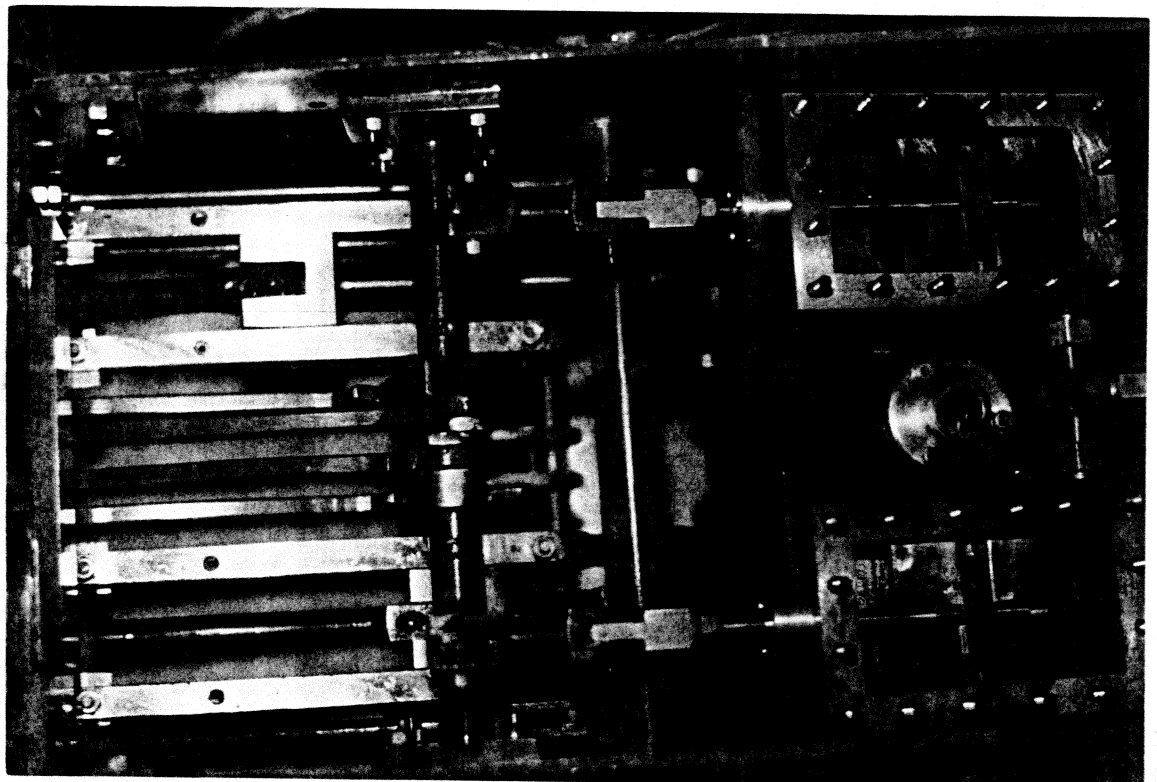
and a photo of same, showing Adjustable Swinging Arm
